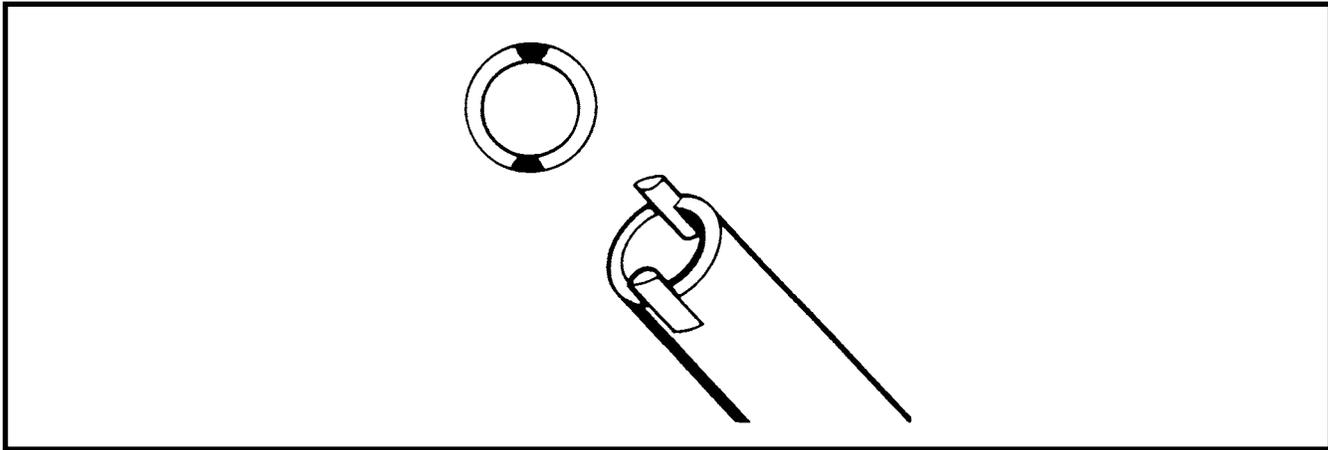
Locally Manufactured Striker Removal Tool
